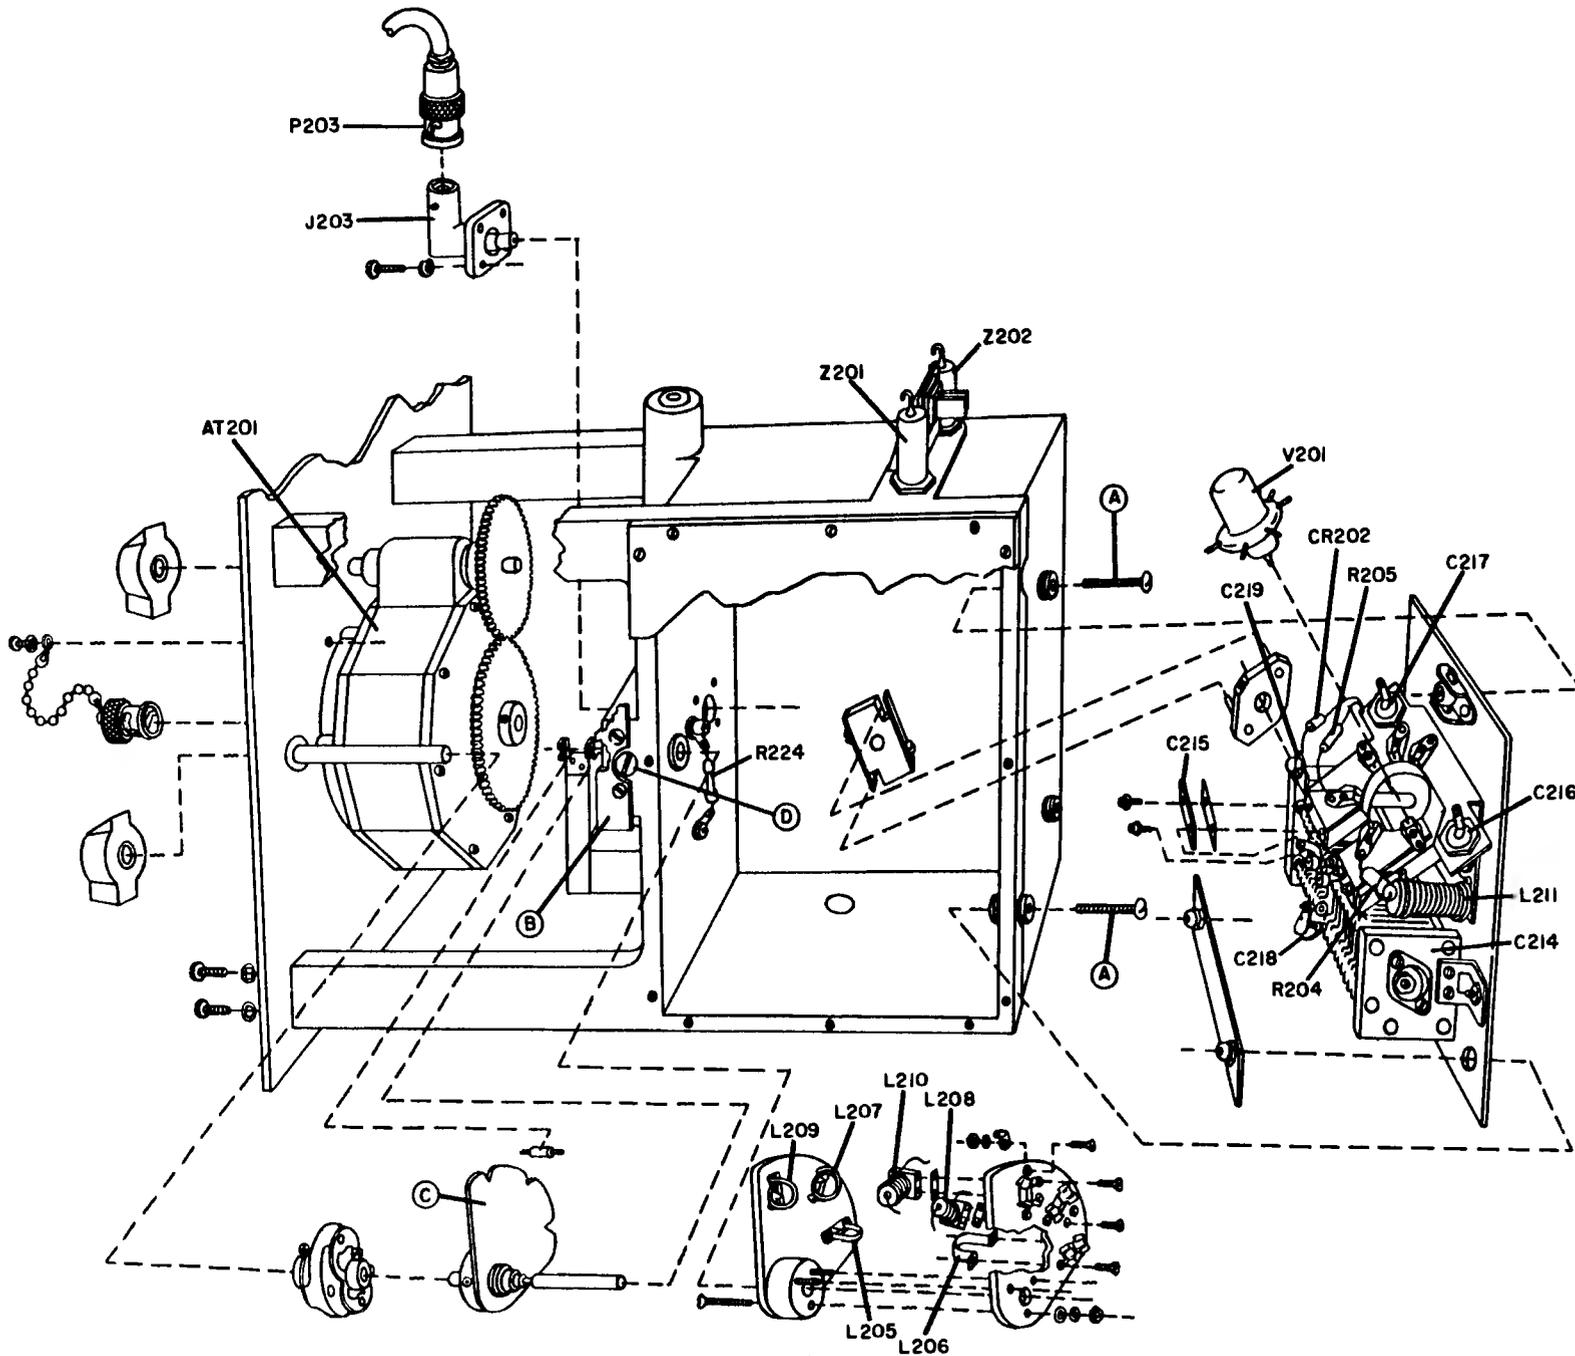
Signal Generator SG-33/TRM-1, Exploded View, Right Side
